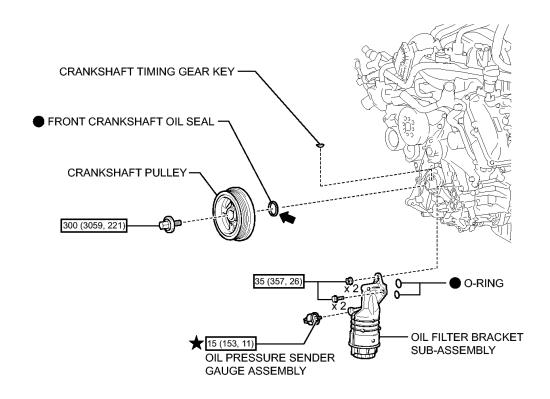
Identifying Front Crankshaft Oil Seal Replacement Components (1 of 2) With Torque Specifications
